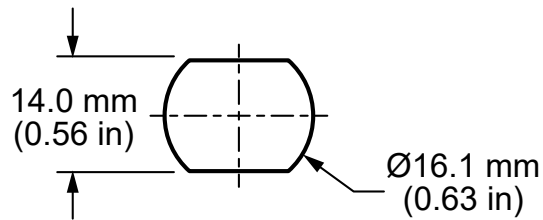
ANT-W63-SPNF1 Mounting Hole Dimensions
